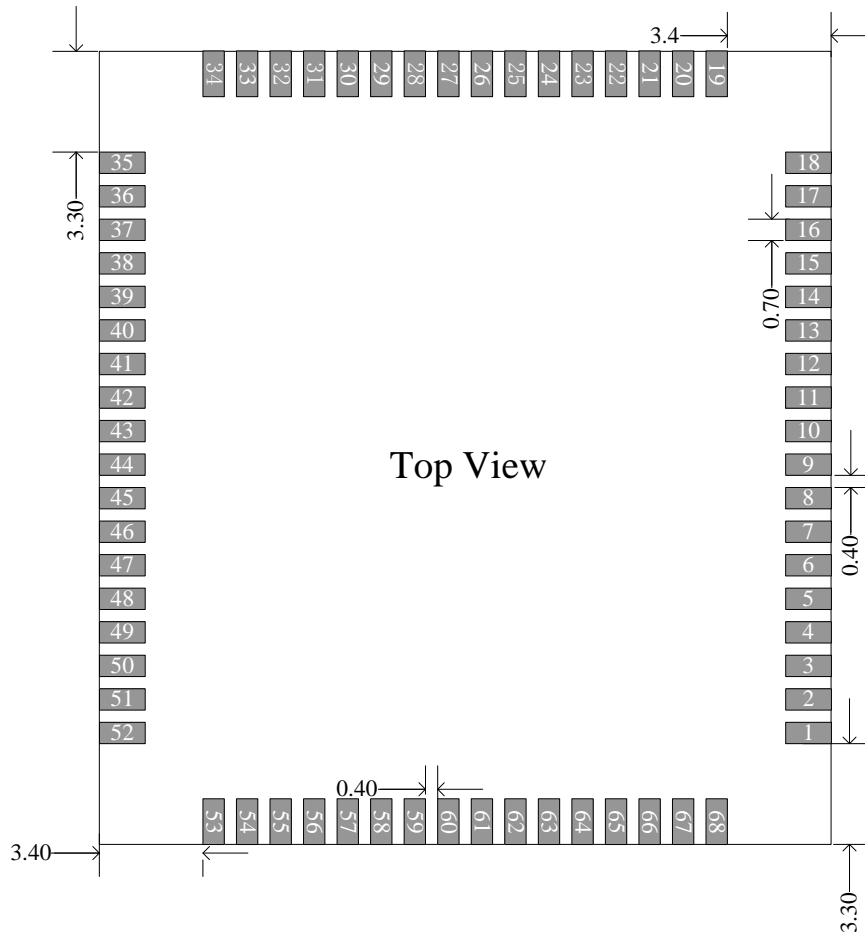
CBB2426 Pad Size and Spacing (unit: mm)
